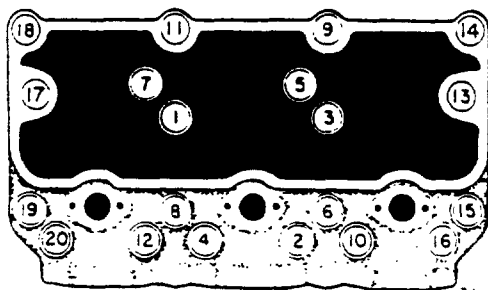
Cylinder Head Stud Nut Tightening Sequence
